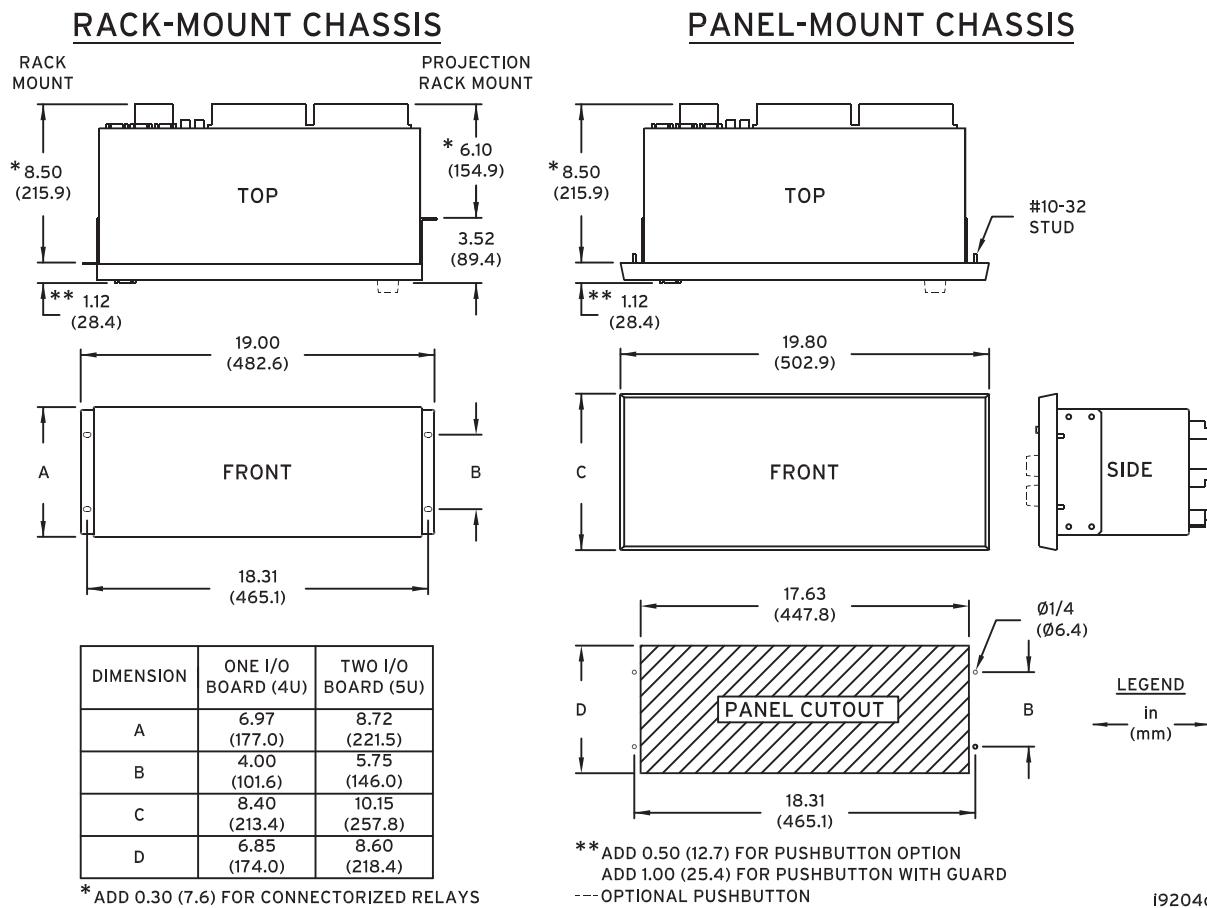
Relay Dimensions and Panel-Mount Cutout
